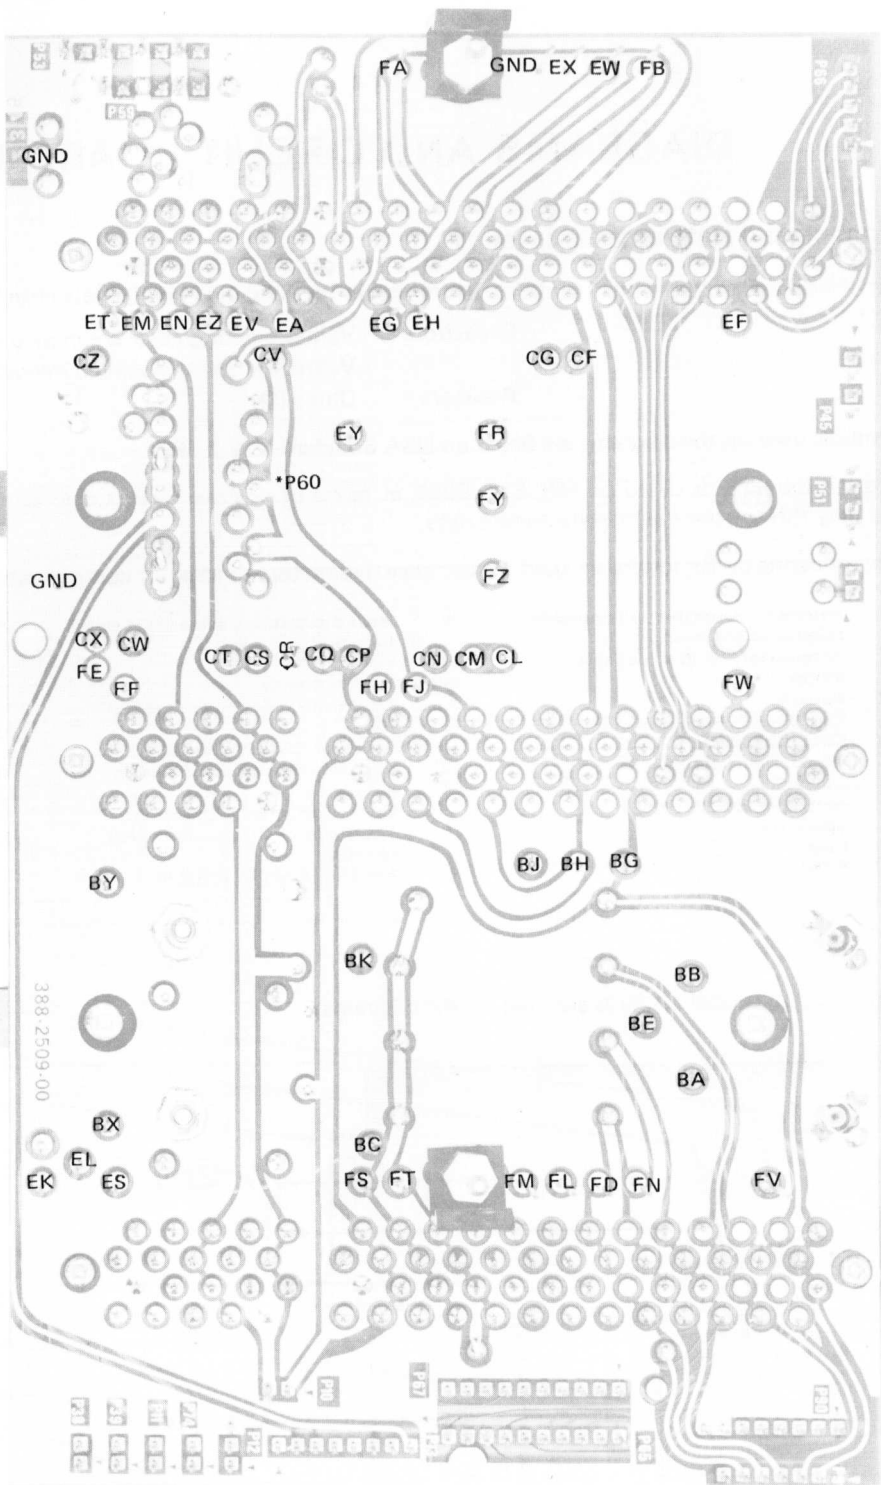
B. A1—Main Interface circuit board assembly (rear).
